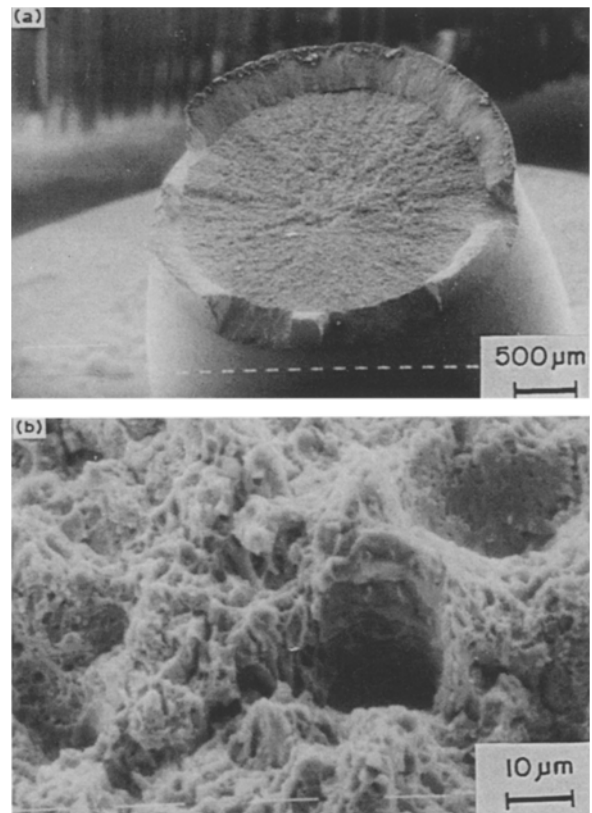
Fracture surface of uncharged AISI 410 steel. Tensile tested at $5 \times 10^{-5} \text{ s}^{-1}$.
